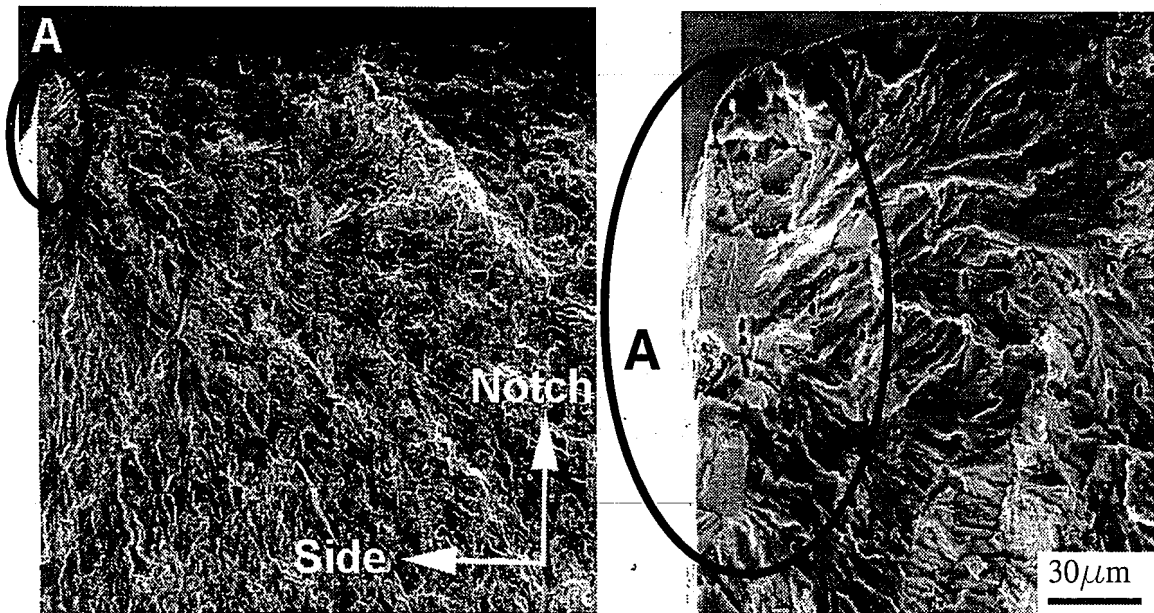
Fatigue crack initiation that occurred outside of the notch in a specimen (A01N52) pre-corroded for 96 hours.
